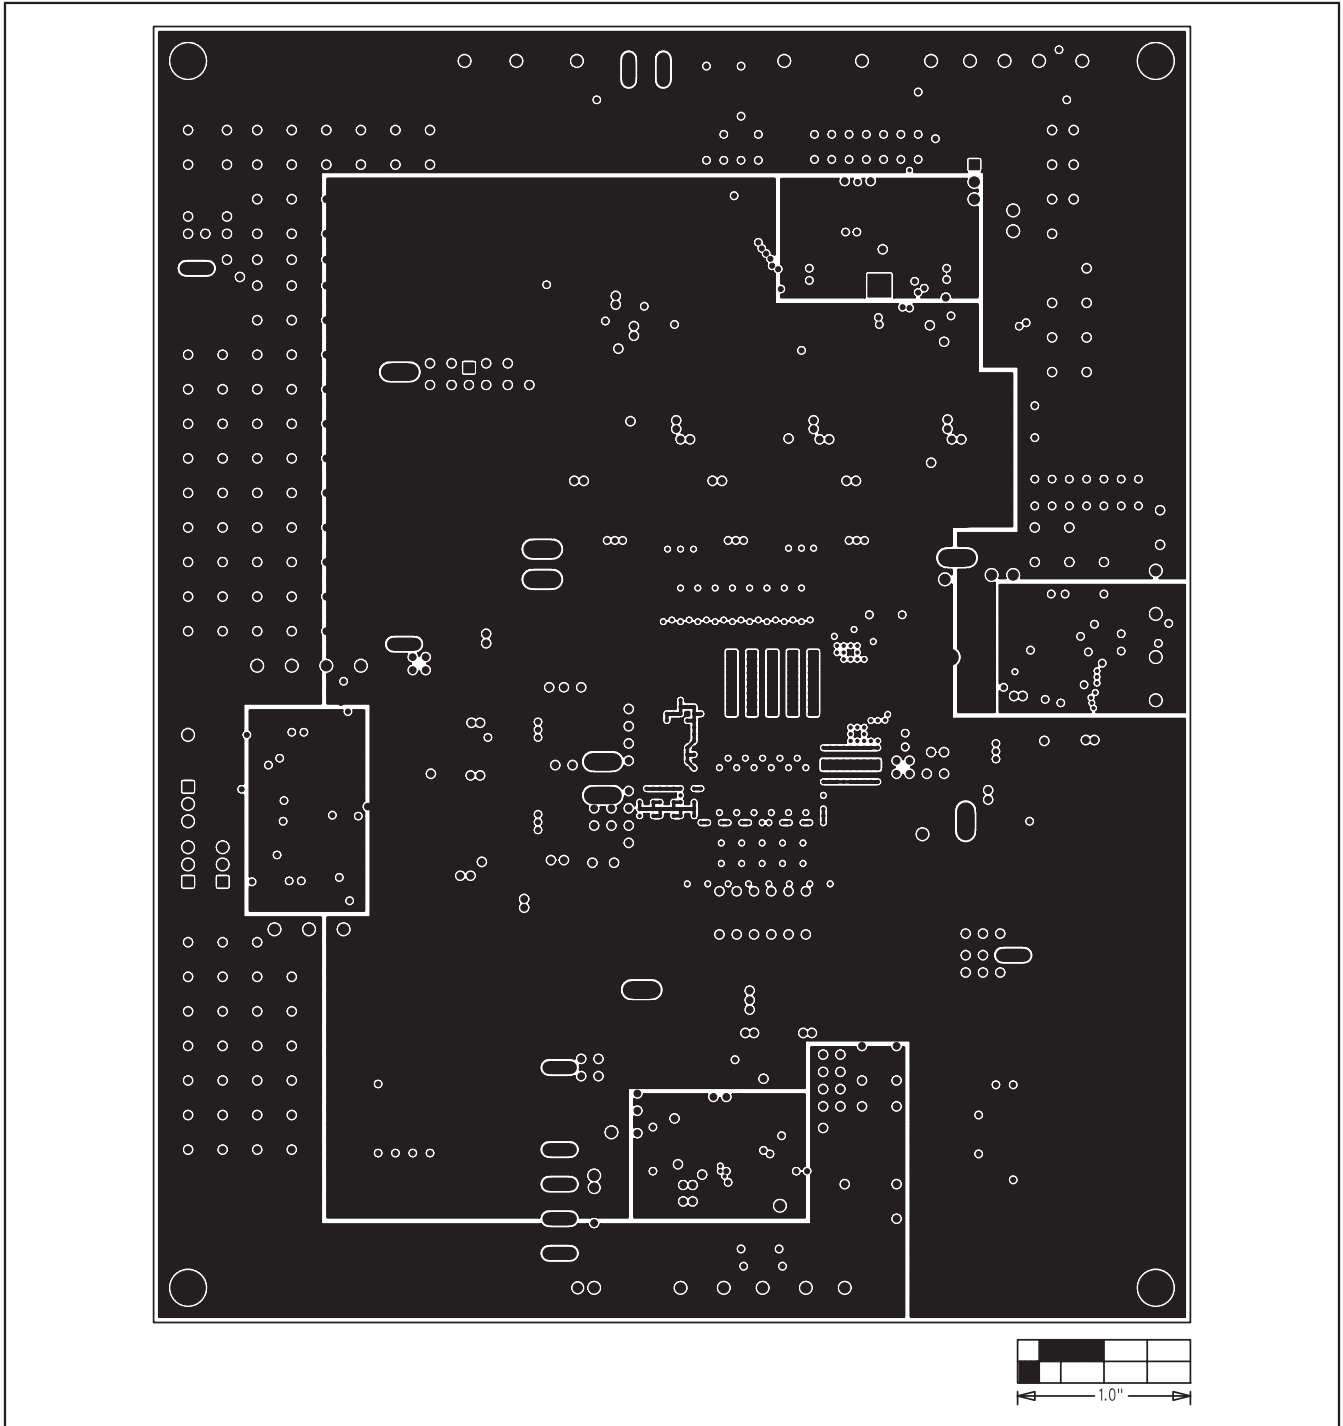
MAX17030 EV Kit PCB Layout—Internal Layer 4 (AGND/PGND Layer)
